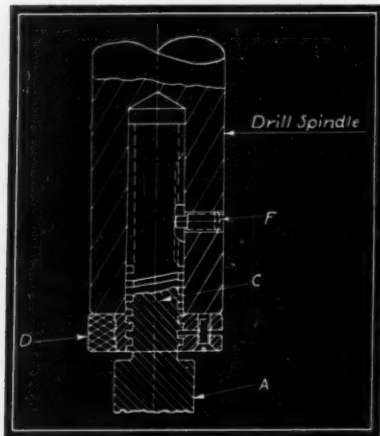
For adjusting the drills when ground down, a drill chuck with square-threaded shank is used
